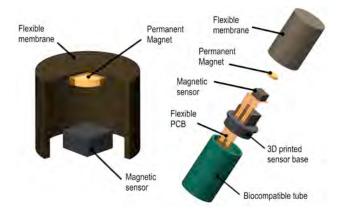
On the left the magnetic force sensor and on the right the assembly on a catheter tip.
